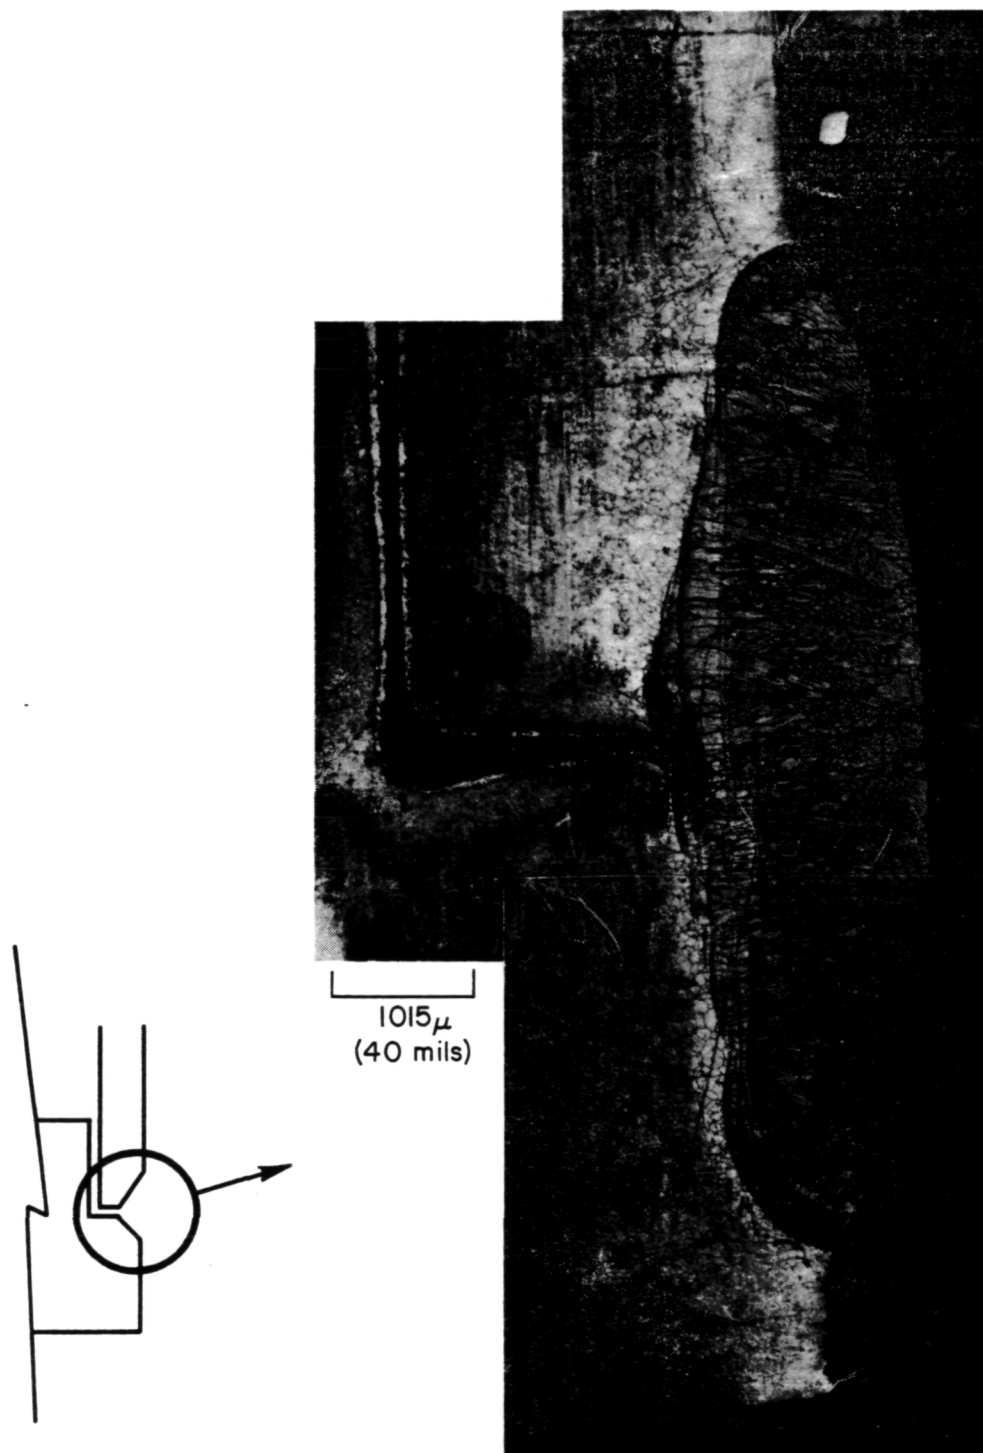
POST-TEST WELD CROSS SECTION MICROGRAPH OF SALT SIDE
